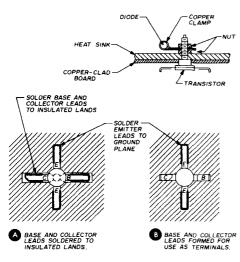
Methods of mounting stripline-opposedemitter packaged transistors. Also shown is a base-bias control diode clamped to the transistor mounting stud for thermal tracking.
